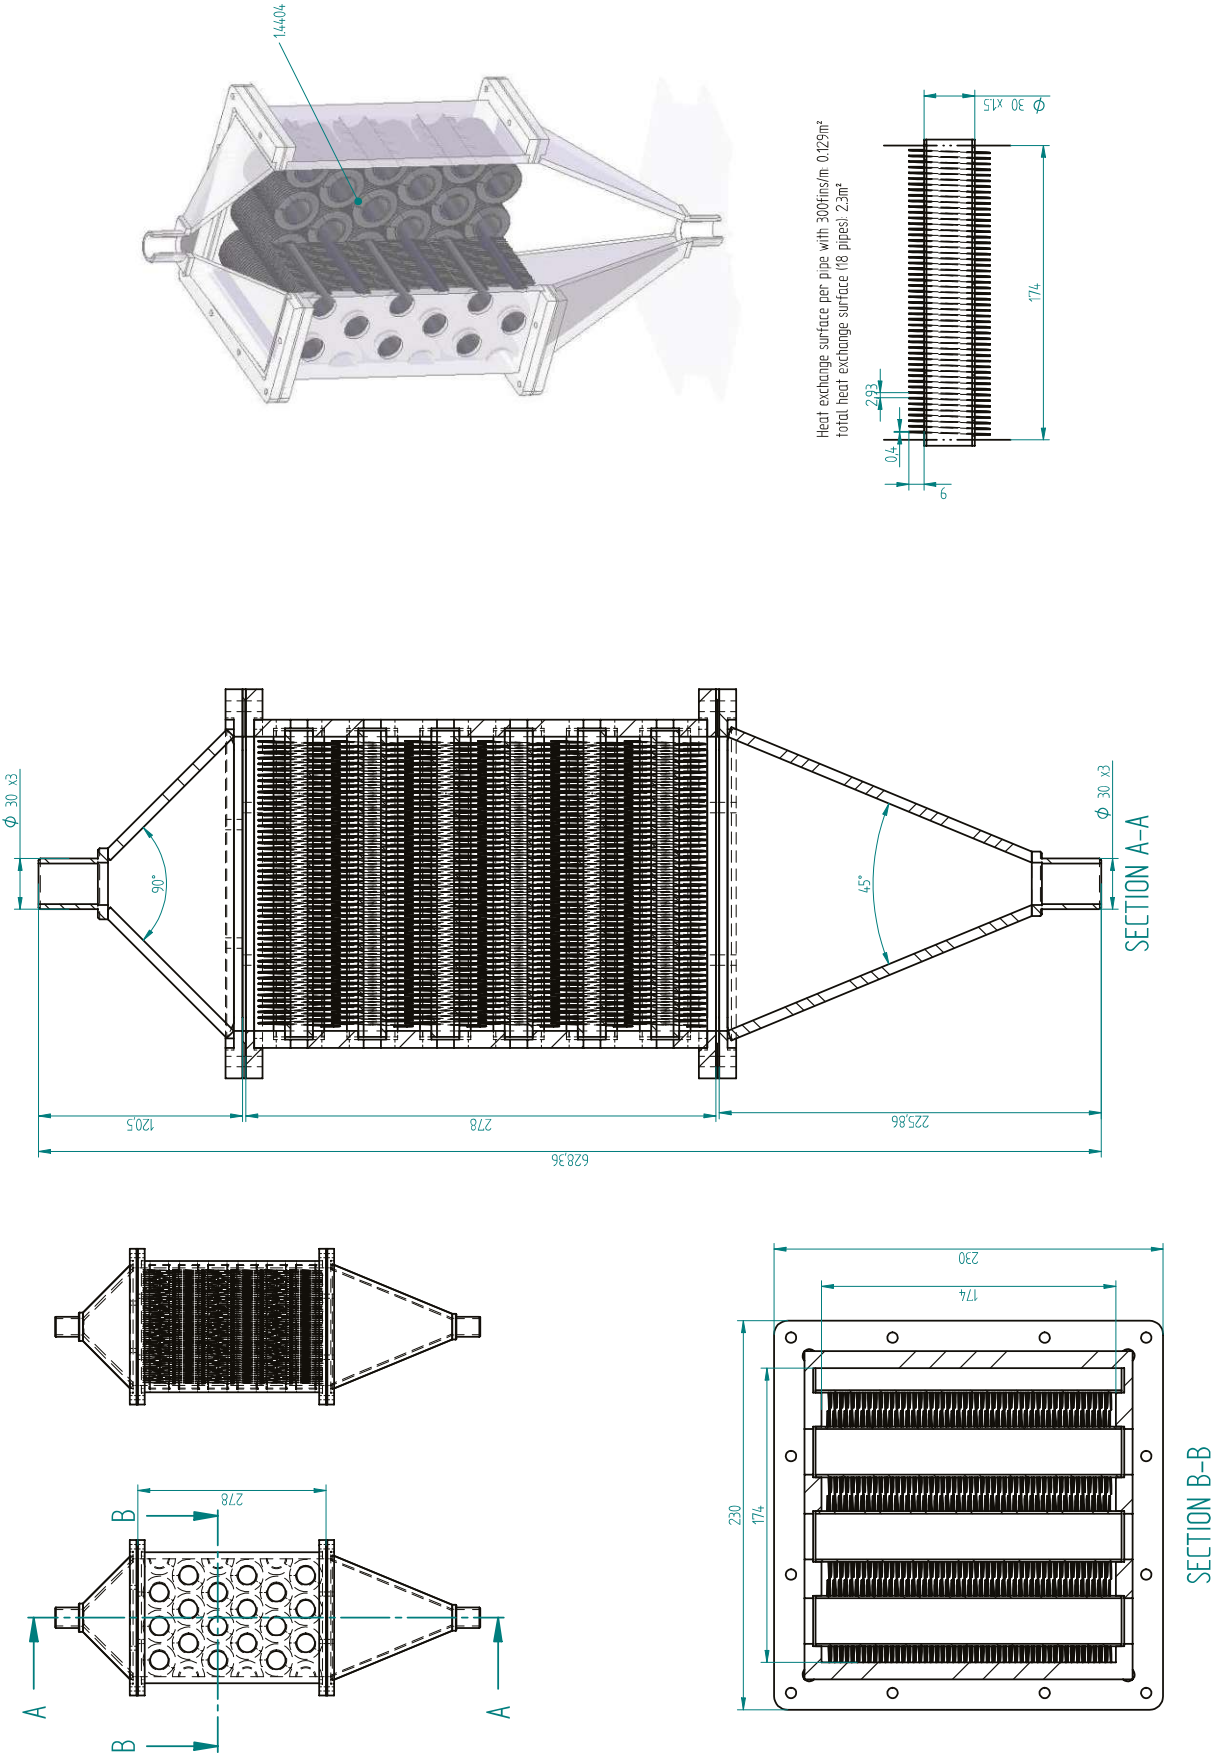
Technical drawing showing the design of the moving bed heat exchanger with heat exchanger pipes with 300 fins per meter (i.e. HEX-300)
